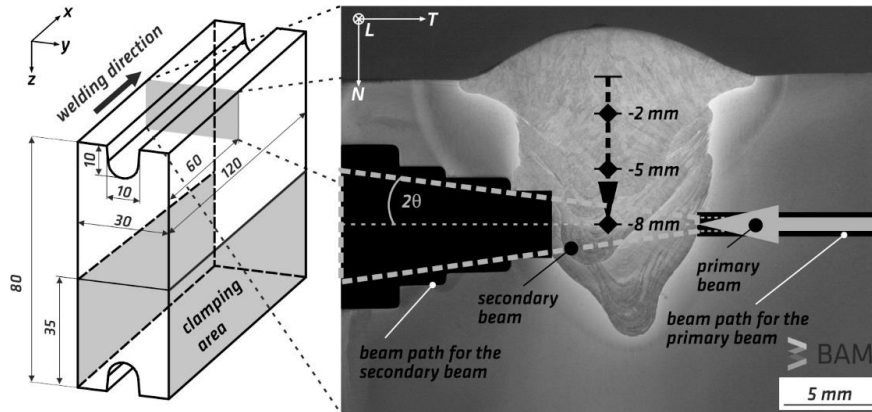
isometric view of the sample in millimeter before welding (left) and cross section of the gauge area after GMA welding of the final pass (third layer), e.g. measuring position in a depth of -8 mm (right)
